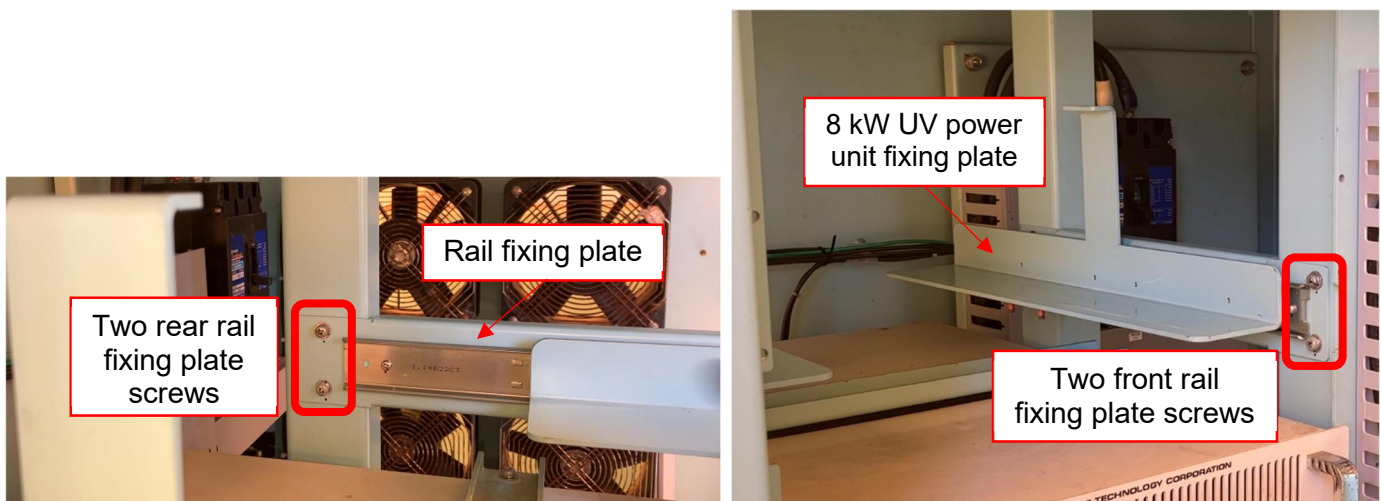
Attachment of rail fixing plate and 8 kW UV power unit fixing plate
